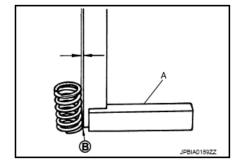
Checking Valve Spring Squareness Using Try Square Courtesy of NISSAN NORTH AMERICA, INC.
